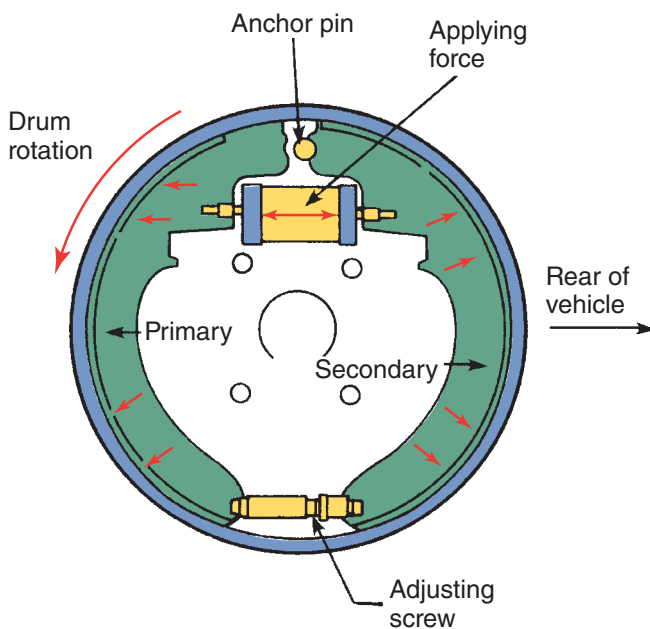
The wheel cylinder pushes the primary and secondary shoes against the inside surface of the rotating brake drum.
